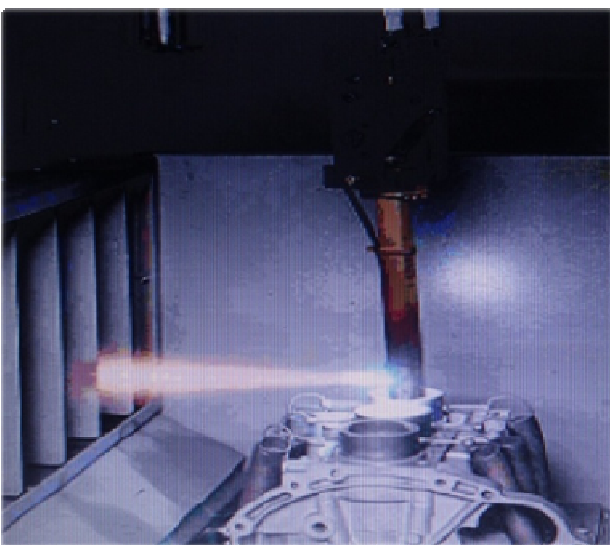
One SM F210 plasma torch in an aluminum 3-cylinder engine block¹⁴
